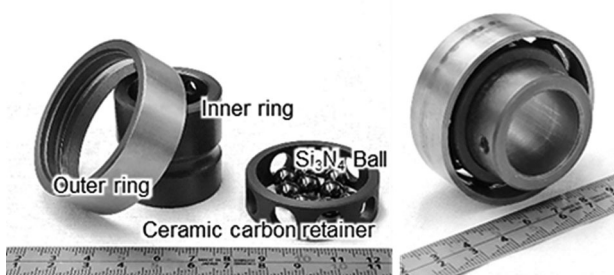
Prototype super heat-resistant Ball Bearing (Left: Before assembly, Right: After assembly).
